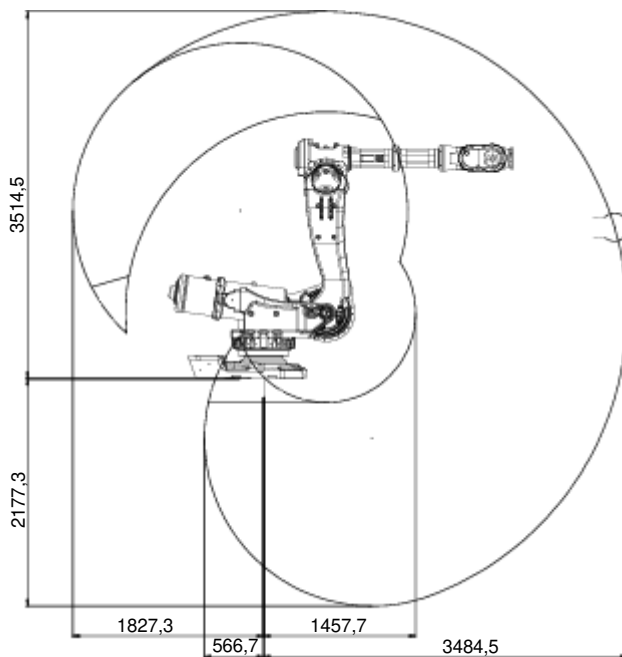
The extreme positions of the robot arm specified at the wrist center (dimensions in mm).
